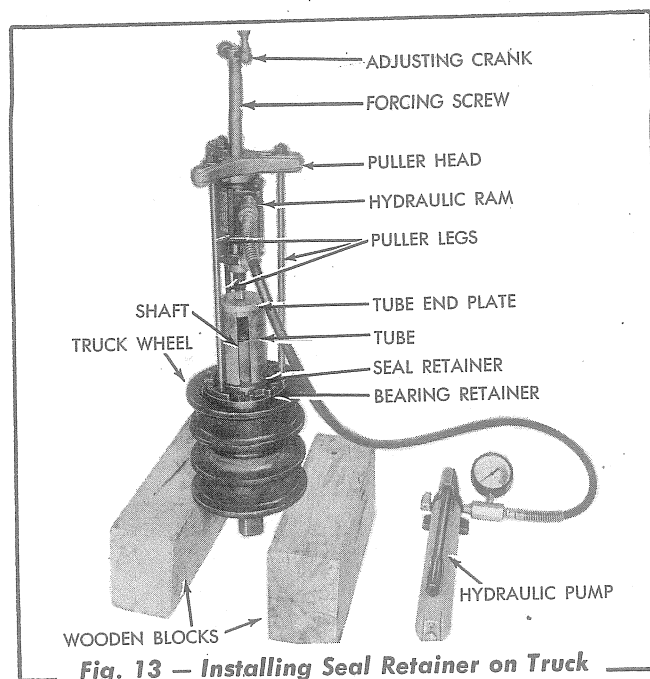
Installing Seal Retainer on Truck Wheel Shaft
